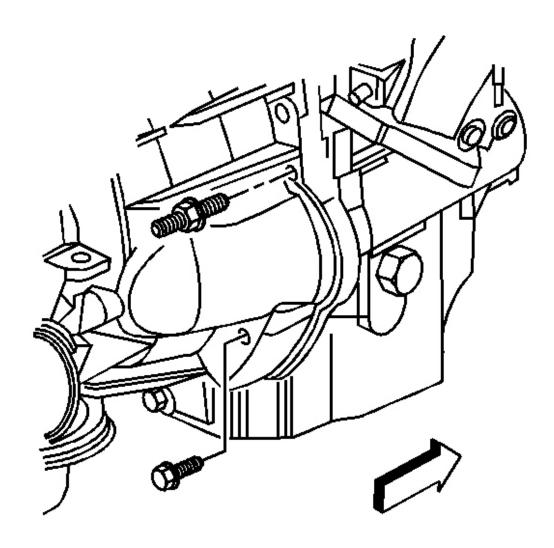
View of Transmission Bolt & Stud (4L60-E) Courtesy of GENERAL MOTORS CORP.
